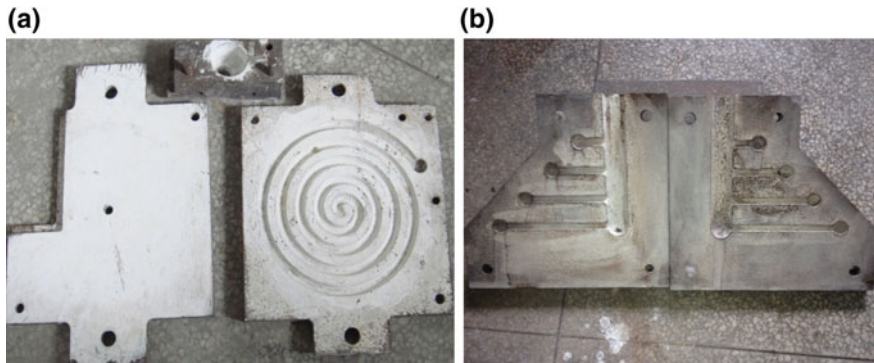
Metal molds for castability evaluation a Spiral fluidity test mold b HTS test mold
